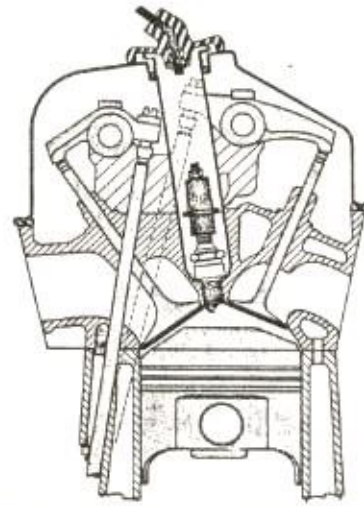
Hemi-426 Engine Combustion Chamber—Cross Section
